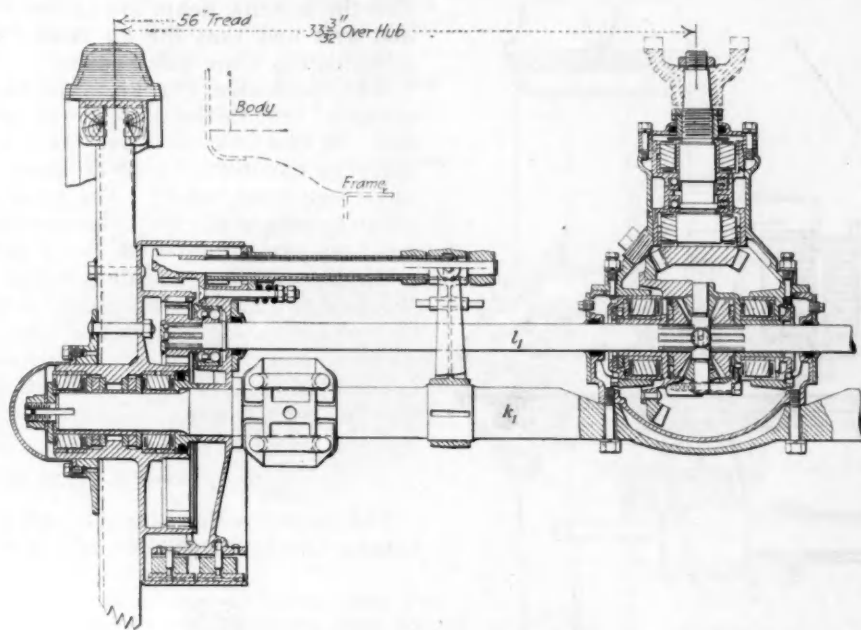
INTERNAL-GEAR-DRIVE AXLE USED ON A 1-TON TRUCK
